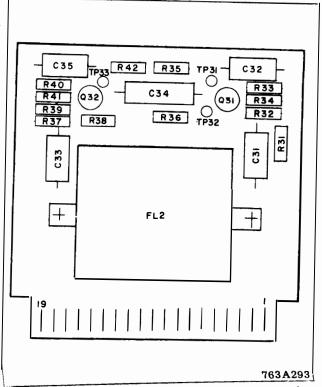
Component locations on I.F. amplifier printed circuit board.
